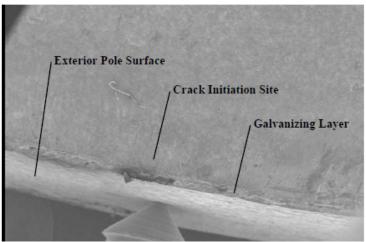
Cracking of the weld between the base plate and the bottom part of the metal pole
